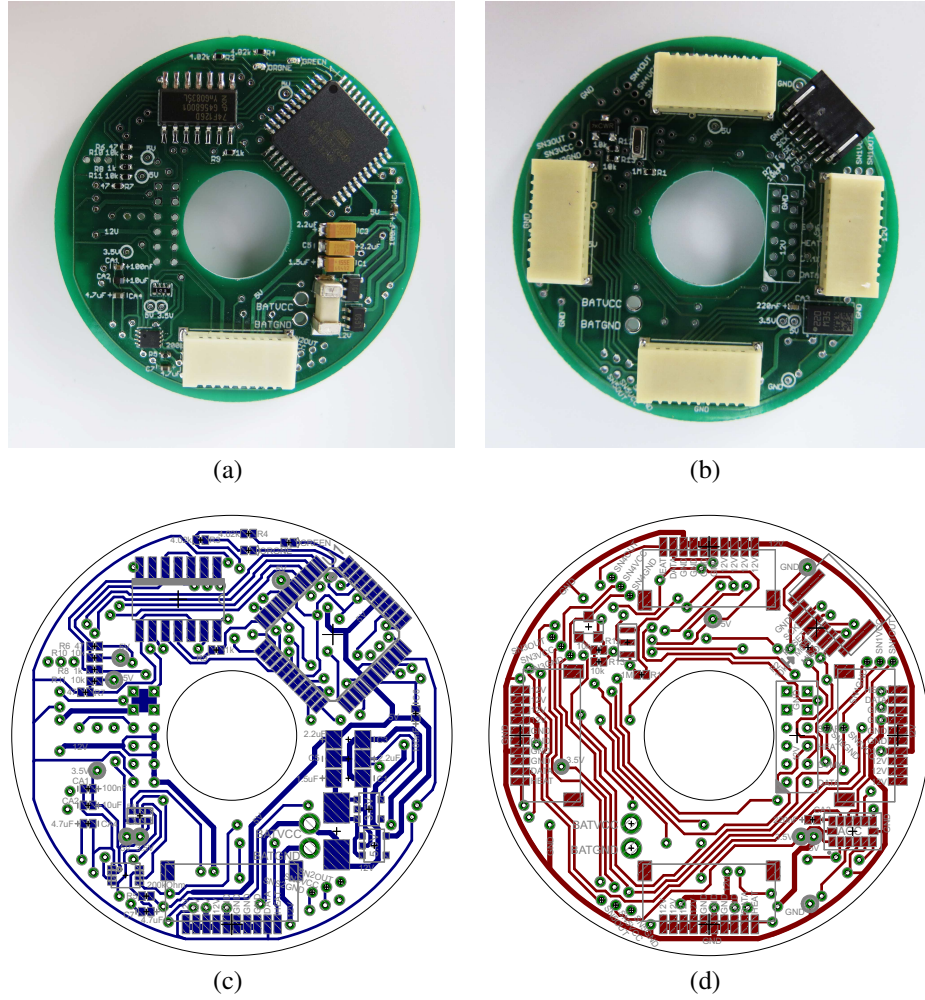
Photograph and schematic of main controller PCB. (a) Top view photograph of assembled PCB. (b) Bottom view photograph of assembled PCB. (c) Top side drawing of PCB. (d) Bottom side drawing of PCB.
